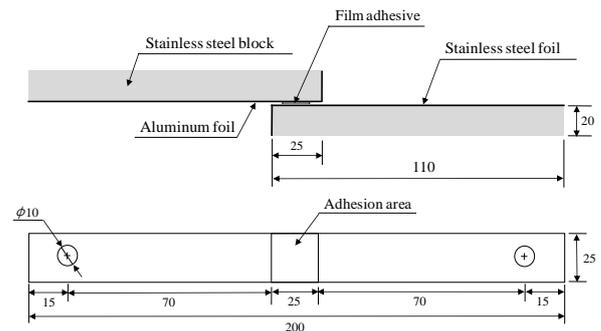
Schematic drawing of the adhesively bonded metal joint specimen for single-lap shear test (dimensions in mm).
